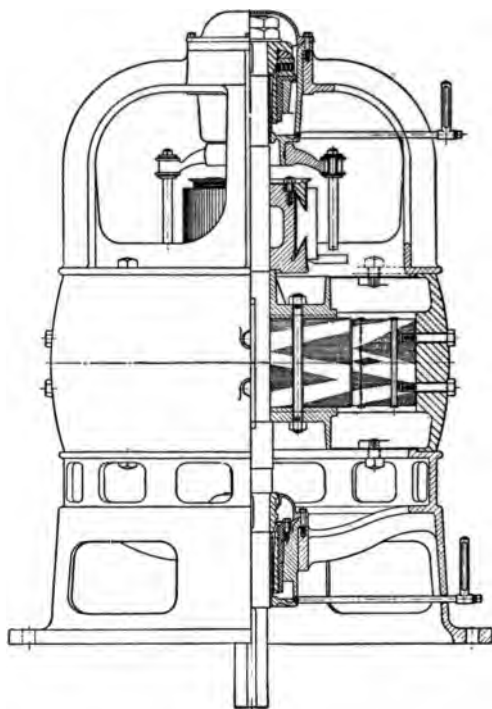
Enlarged Section of Fort Wayne Vertical Motor in Fig. 334.
